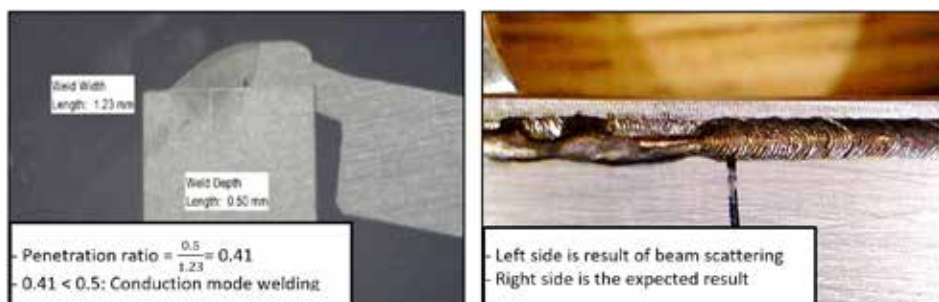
Weld cross section of the package (left). Evidence of discontinuity in the weld (right).
